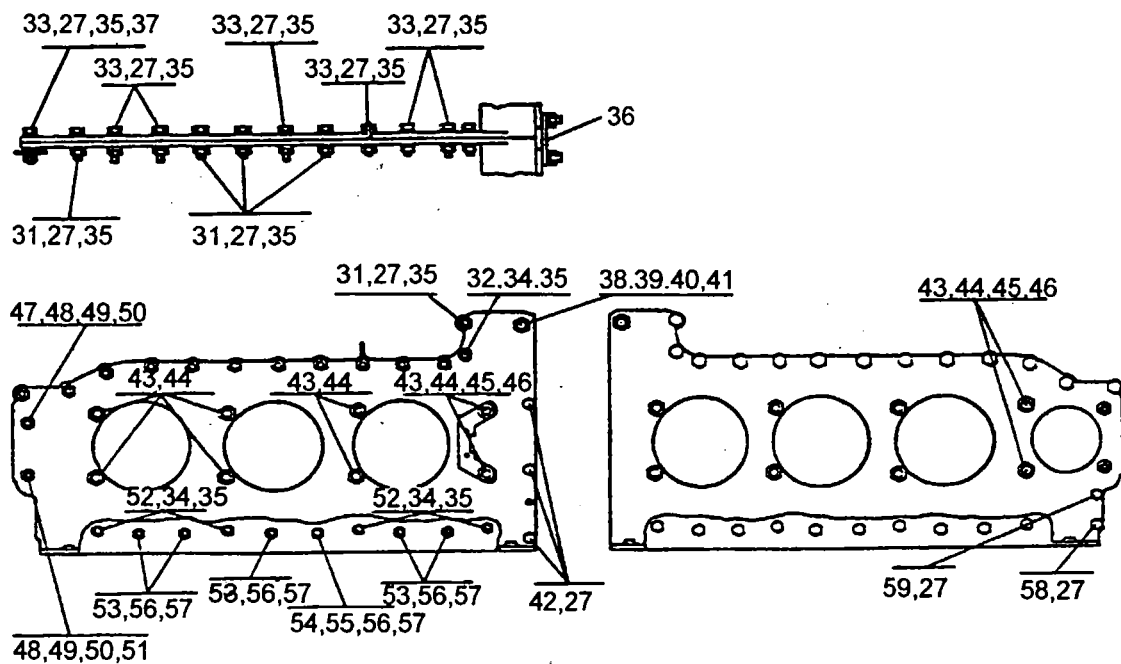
CRANKCASE ATTACHING PARTS IO-550-N2B
